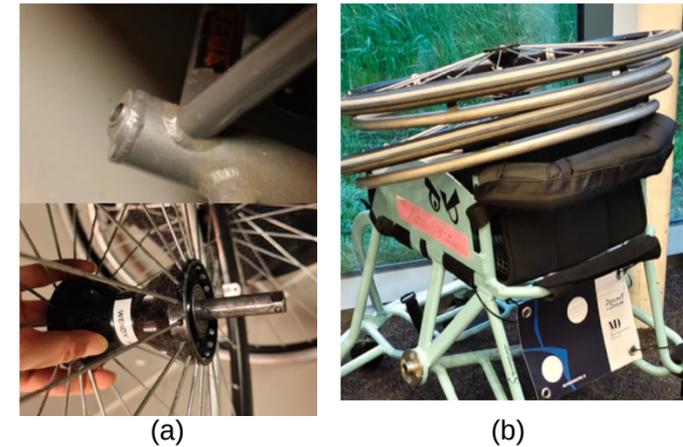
Rear wheel connecting spot (a) and how rear wheels placed (b)
